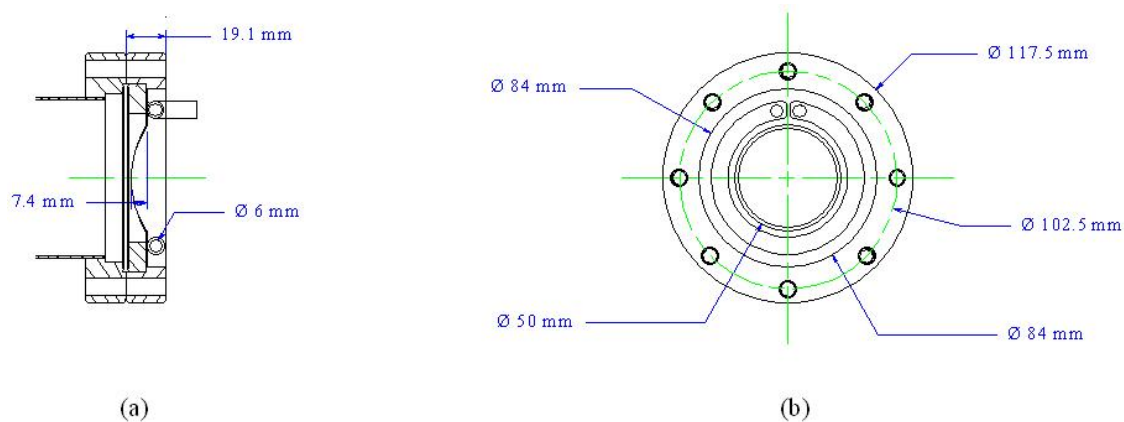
Section view of 2.3-MW-capable beryllium window. (b): End view of window assembly.
